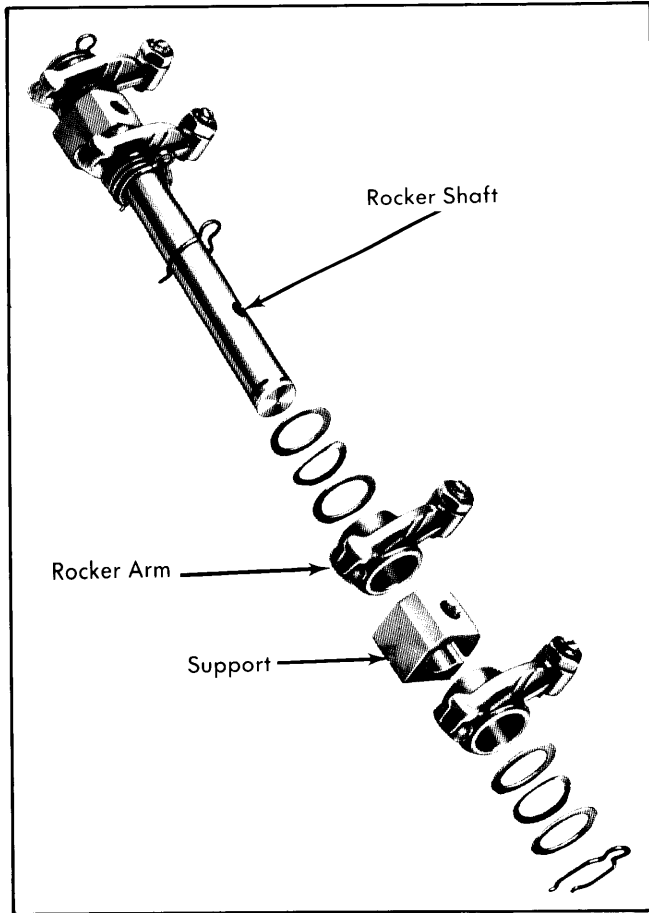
Expanded View of 1600 cc Rocker Arm Assembly
